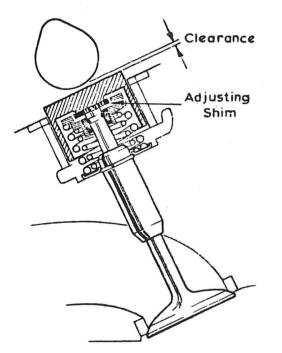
VALVE ADJUSTMENT. 79-50-4E
